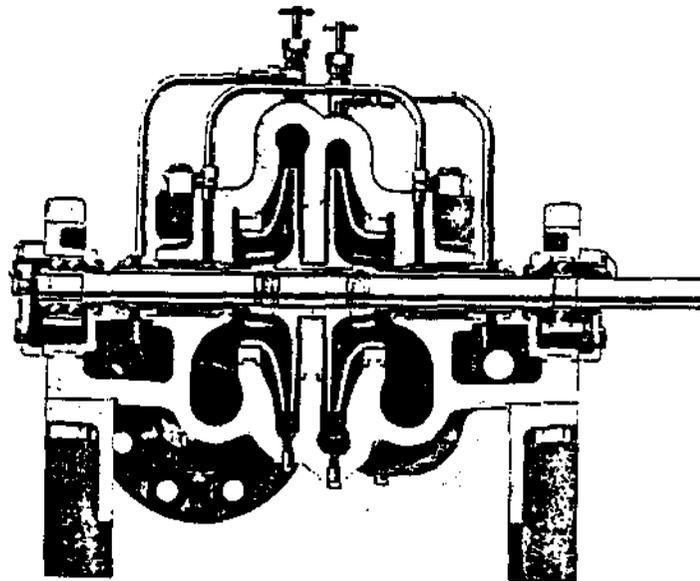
Two-stage horizontally split pump with opposed impellers
